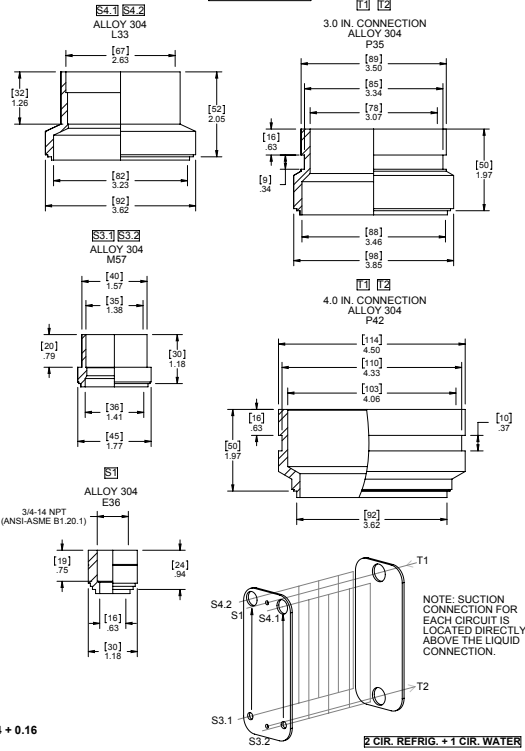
AGZ075E - 180E Brazen Plate Evaporator Dimensions
